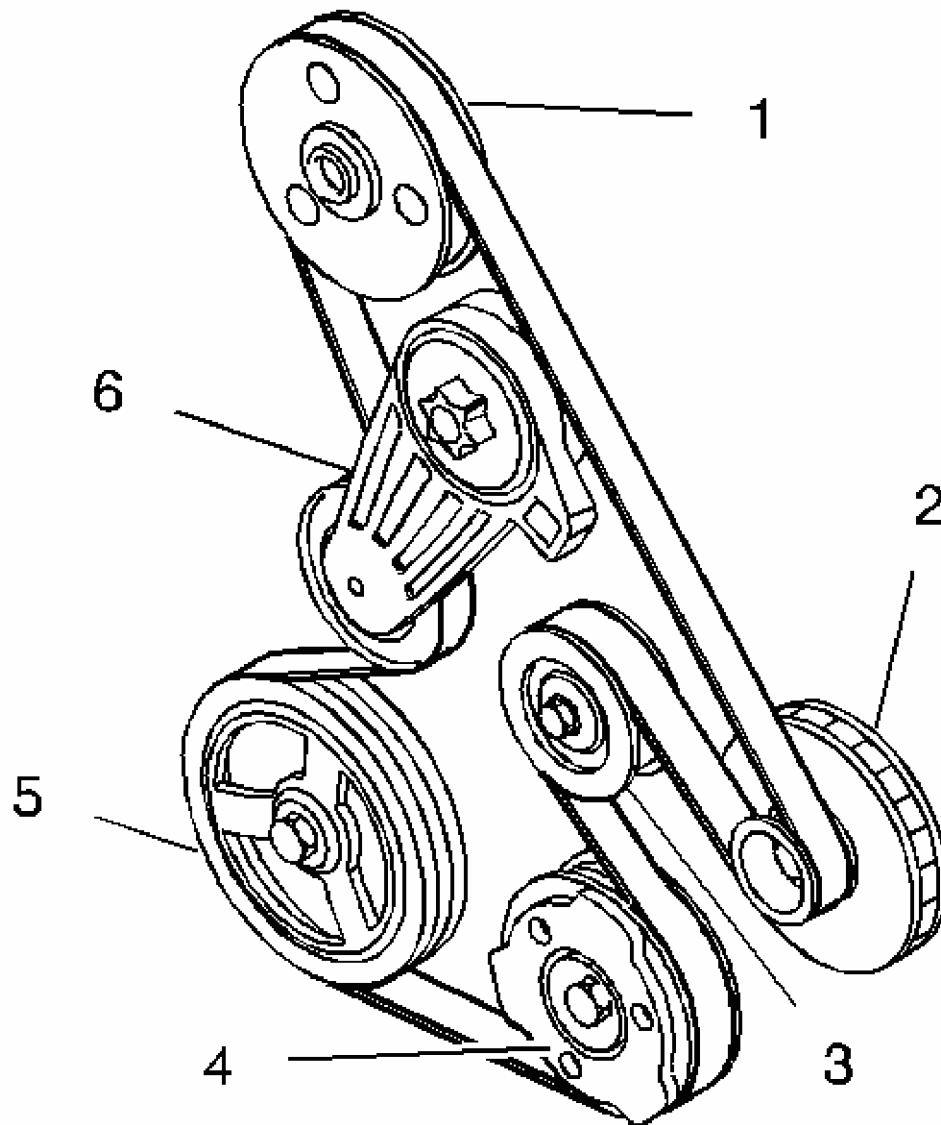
Identifying Power Steering Pulleys, Drive Belt & Drive Belt Tensioner
